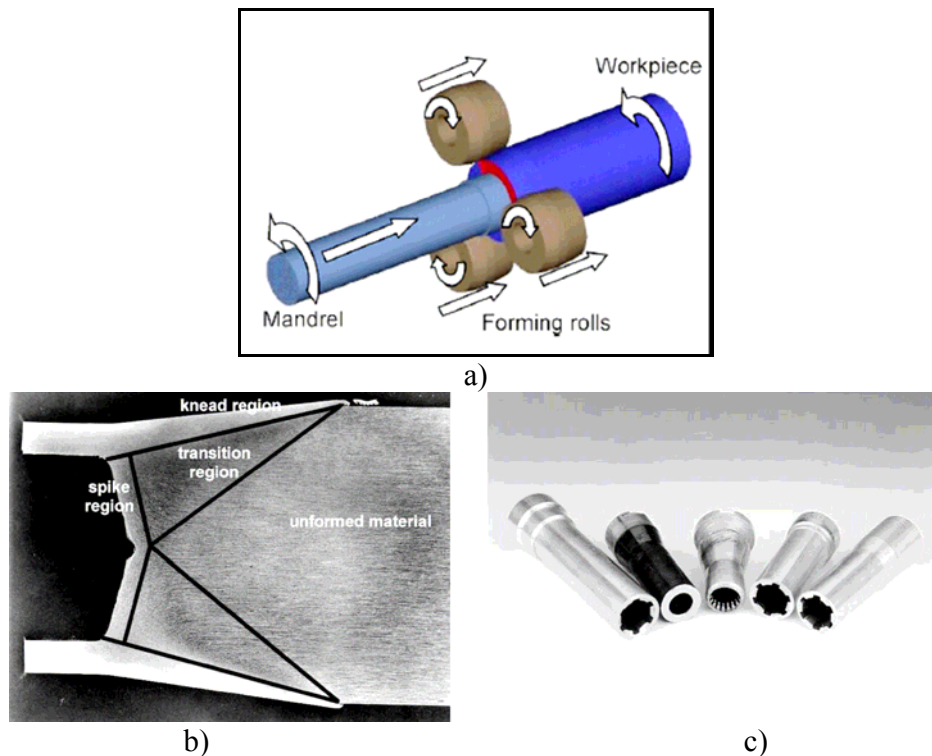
a) principles of spin extrusion, b) deformation regions of the spin extruded metal and c) shafts produced by spin extrusion [60].
